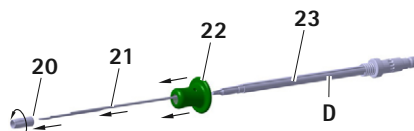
Disassembling the S<sup>4</sup>C screwdriver
